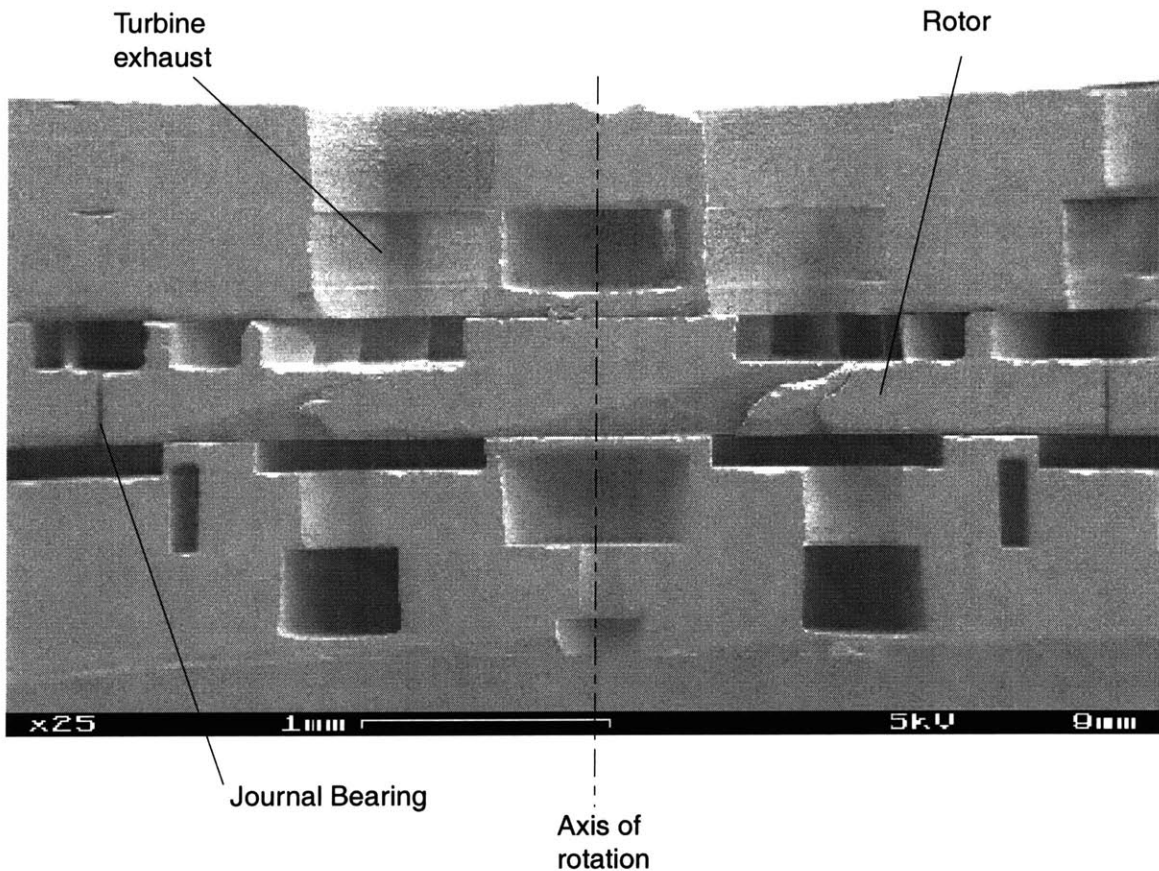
Micro-bearing rig die-cut cross-section. (courtesy of C.C. Lin)⁷
